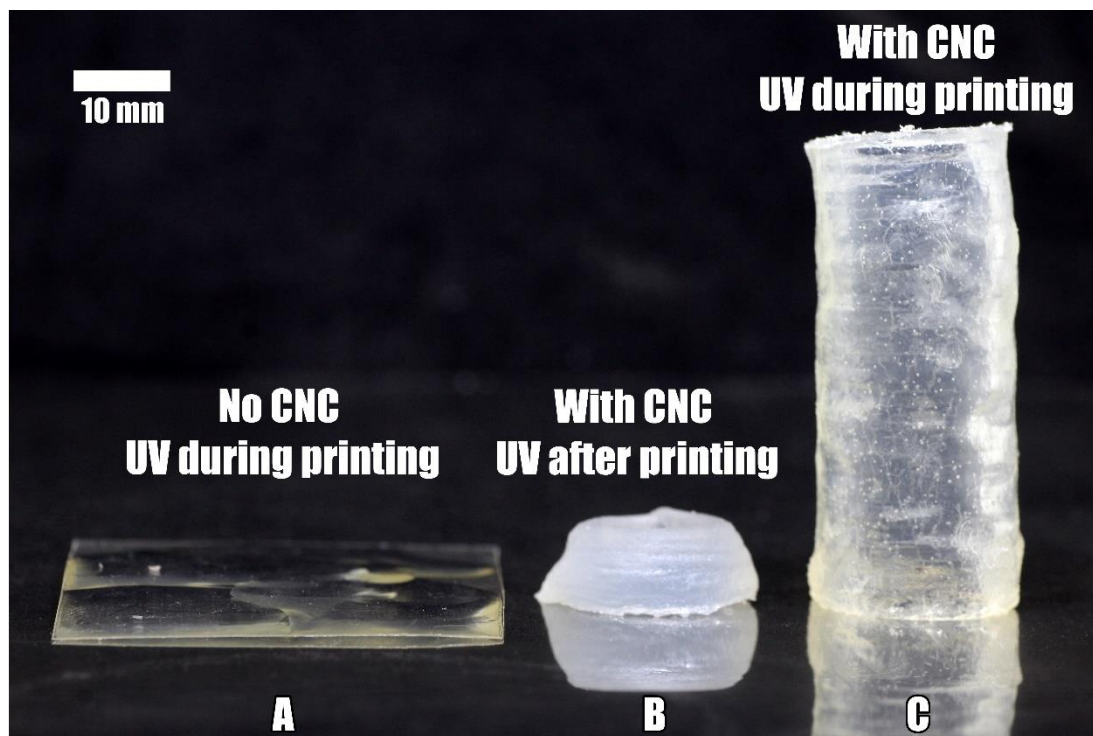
DIW-printed objects (A) with 0% CNC and UV-cured during printing (B) with 2.4% CNC and UV-cured after printing; the object is composed of 14 printed layers. (C) A cylindrical object printed with 2.4% CNC and UV-cured during printing. The object contains 32 printed layers.
